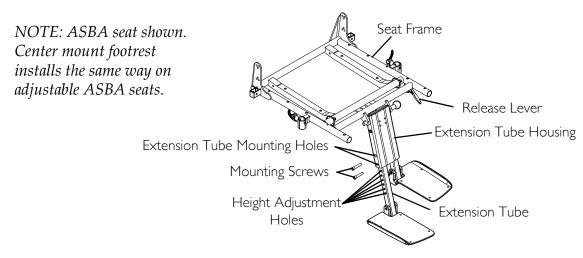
Adjusting the Height of the Center Mount Footrest
